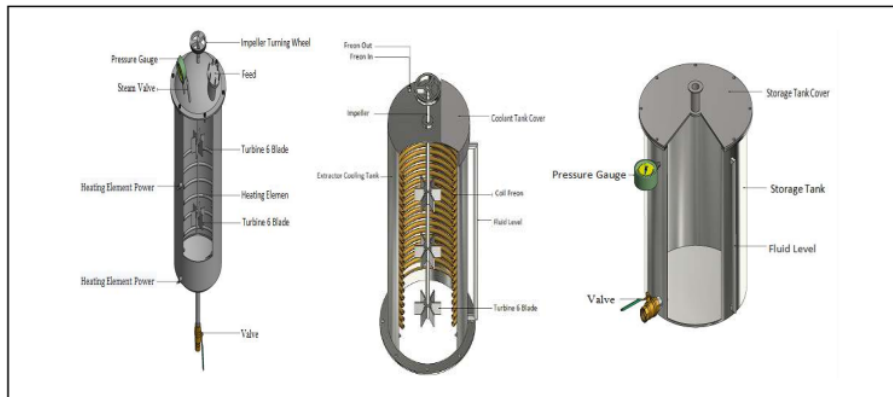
Design. Heater Extractor Coolant and tannin container
